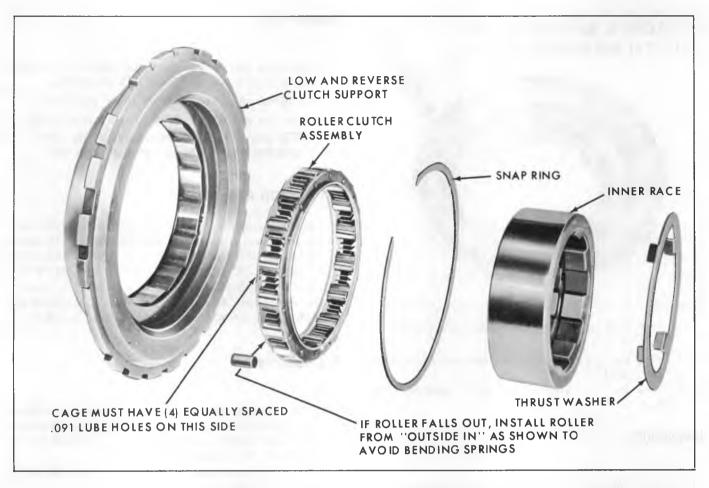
M--Low and Reverse Clutch Assembly--Exploded View
